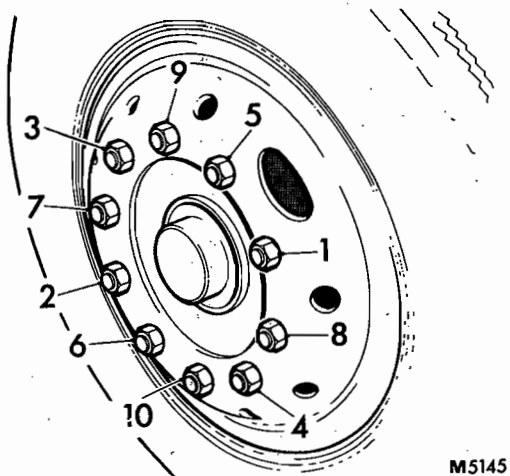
WHEEL NUT TIGHTENING SEQUENCE
